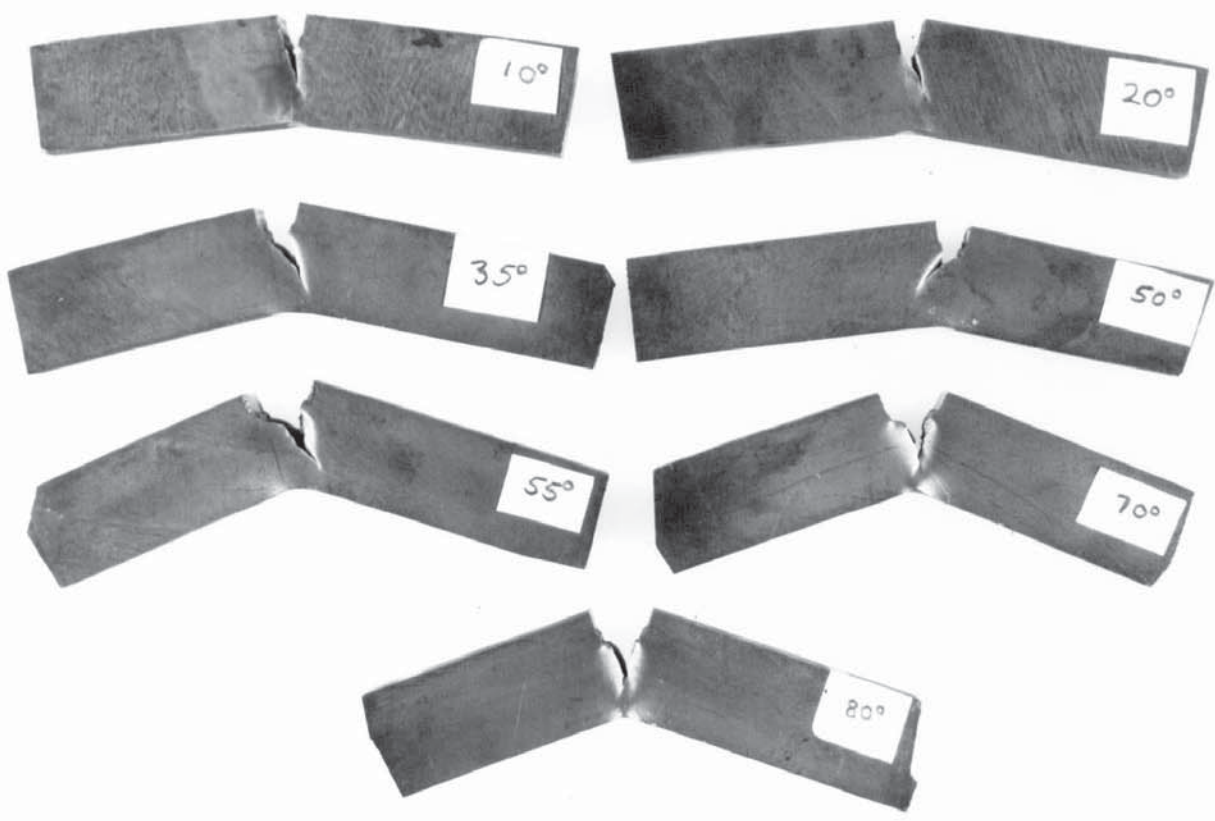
Effect of Weld Angle on Crack Direction in Bend Specimens
